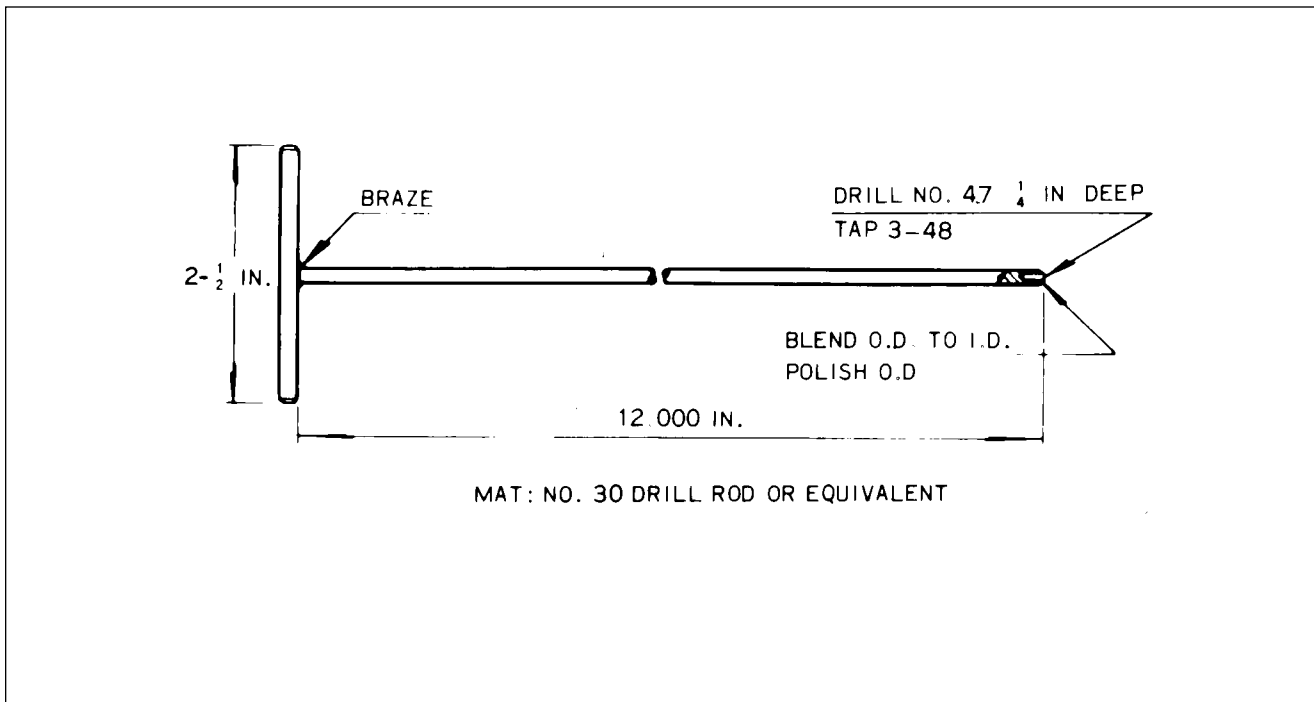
Assembly Tool For Ignition Harness Insulating Sleeve Installation
